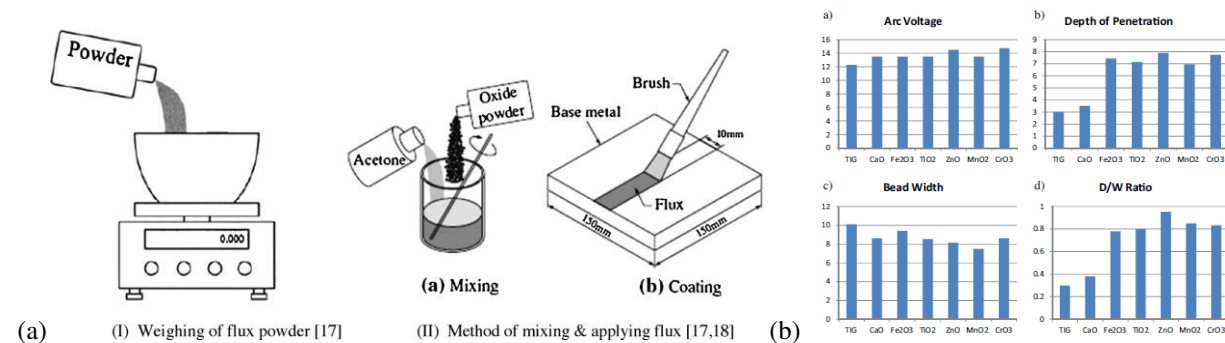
(a) Application of flux for A-TIG welding process & (b) Relative changes in penetration depths, bead width, voltage and D/W ratio of welds with and without flux
